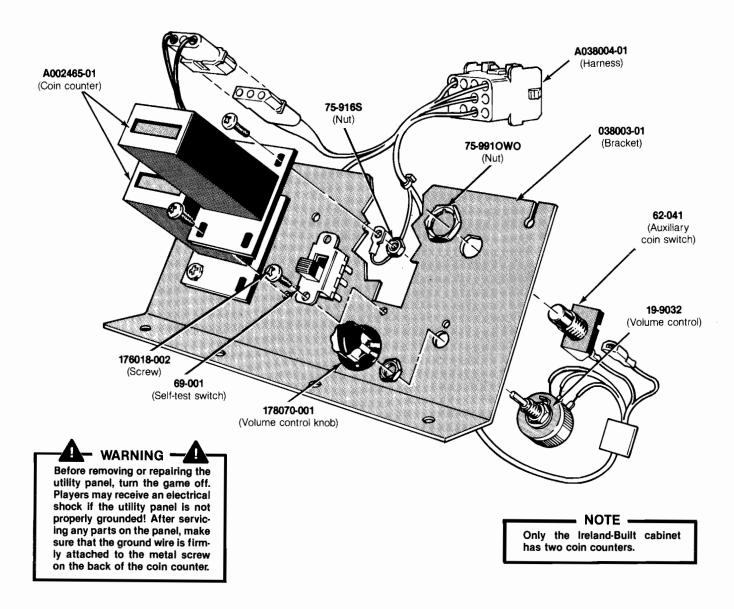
Utility Panel Assembly A038002-01 & -02 G Parts List
